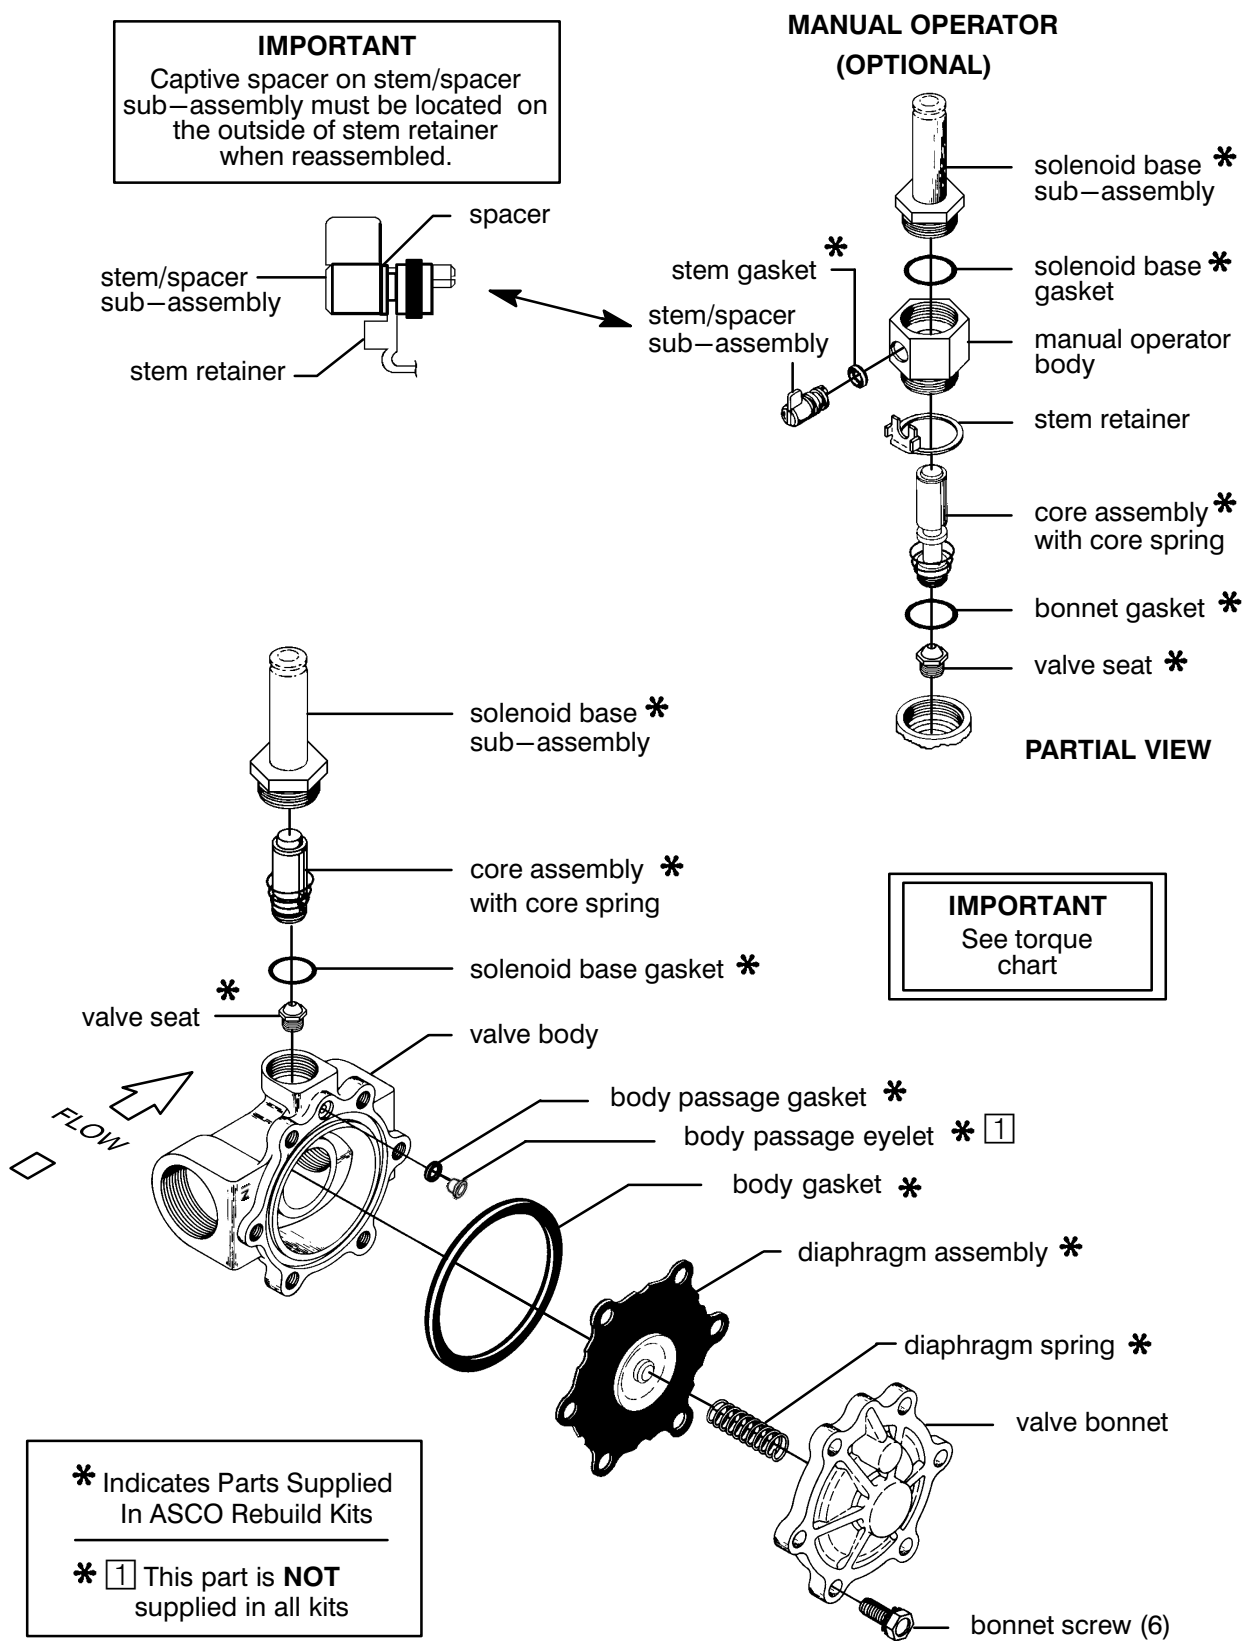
Series 8210 valve without solenoid, DC construction with 1 1/2" NPT valve body shown.
